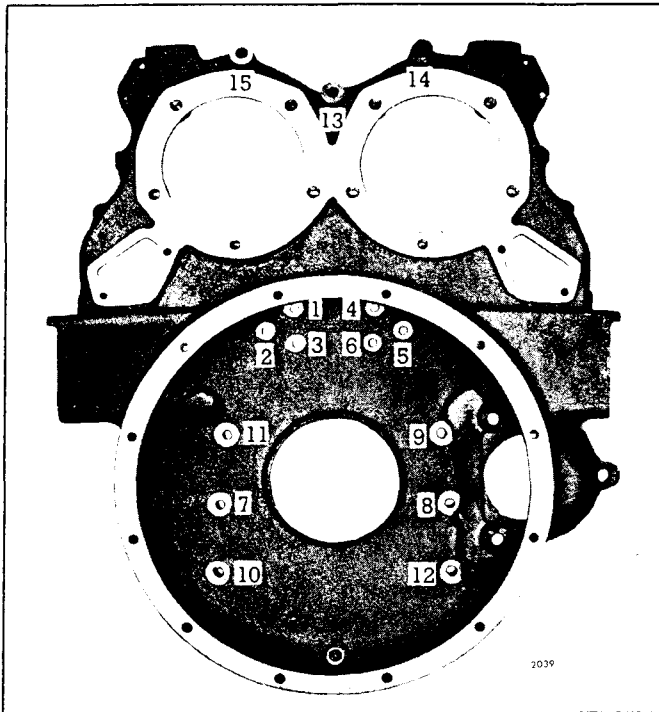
Flywheel Housing Bolt Tightening Sequence (Operation 1)-In-Line Engine
